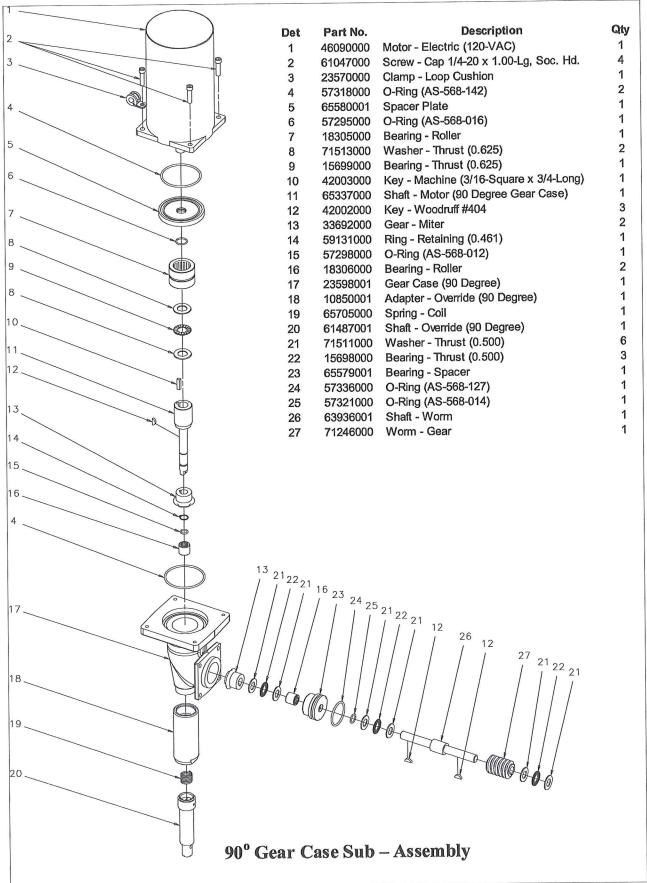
Obsolete Design - Part Number 81572001 - 90° Gear Case Sub – Assembly
